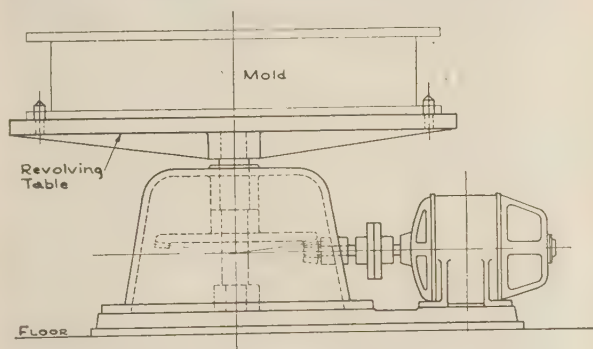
FLOOR-TYPE CENTRIFUGAL CASTING MACHINE
